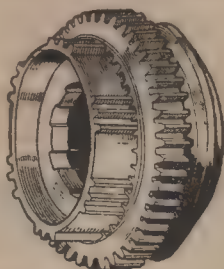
First mainshaft gear splined to slide on the synchromesh sleeve.
